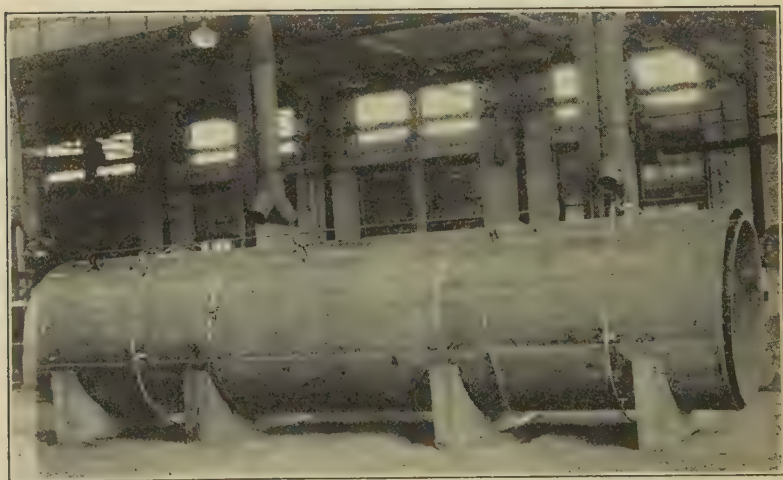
Arc-welded destroyer smokestack.
